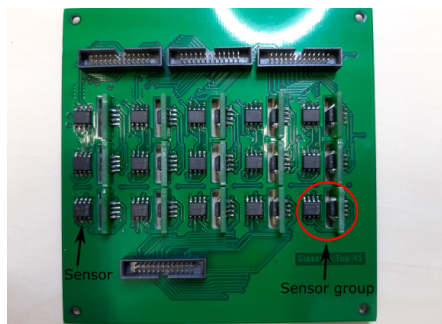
Picture of AMR sensors soldered to the PCB. In total 45 AMR sensors are mounted on the board. Sensors are soldered to the small adapter pieces to rotate their sensitive axis perpendicular to the plane of the PCB. On the backside, opposite to the sensors soldered directly to the board are sensors rotated 90°. By using all three types of sensors, we are sensitive in every direction. This results in a 3 x 5 grid of sensor groups.
